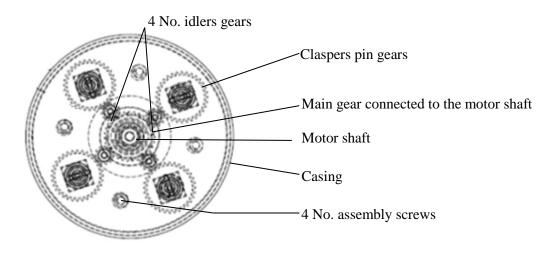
The compound gears of the rotating head - plan view of the phantom view
